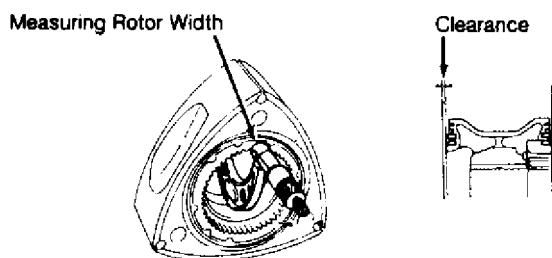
Measuring Rotor-to-Side Housing Clearance
